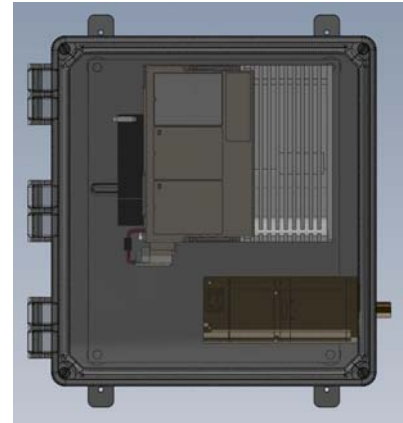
Top view of initial safety enclosure with motor and motor driver.
